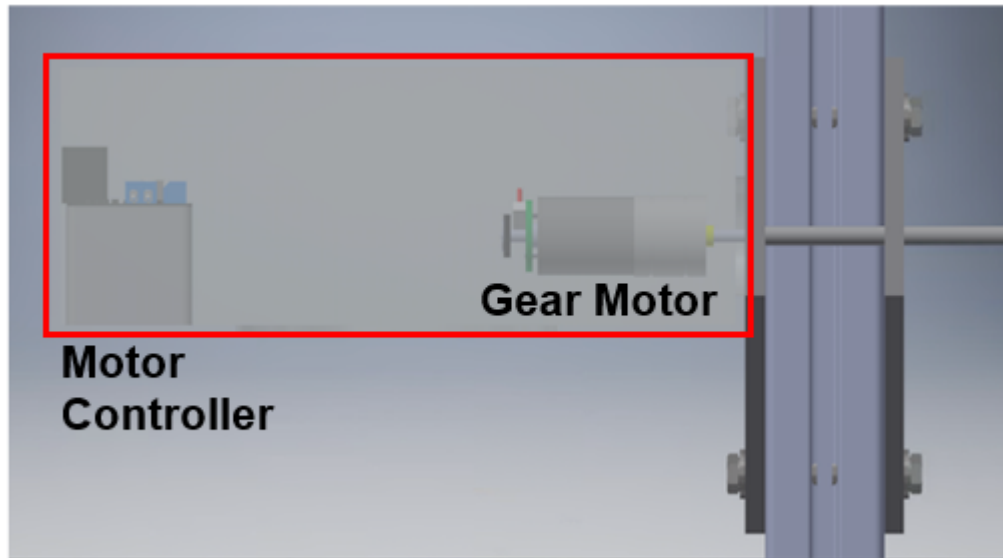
Rendering of how the gear motor and motor controller mount to the stand. The image is a front view of the mounting and illustrates the clear plastic enclosure surrounding the motor and the controller (enclosure outlined in red).
